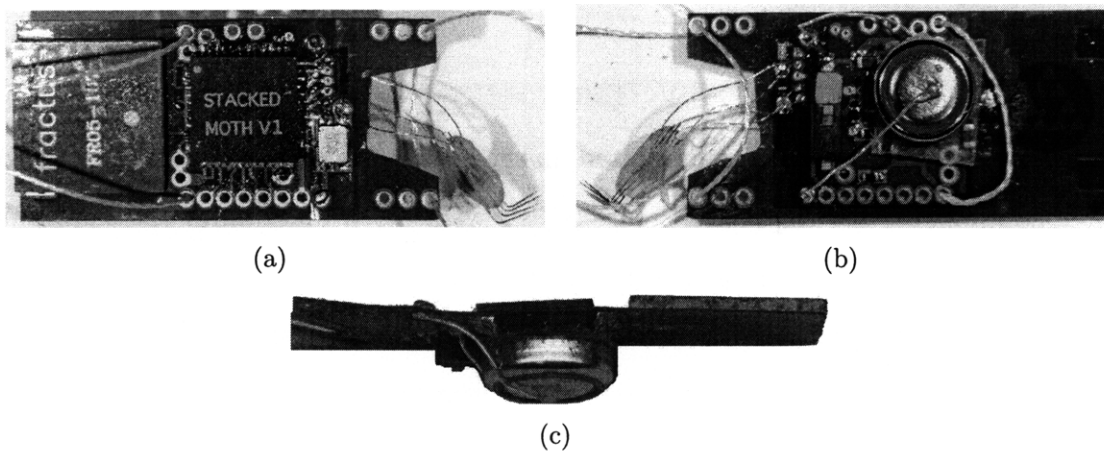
Flexible PCB (a) top, (b) bottom, and (c) side.
